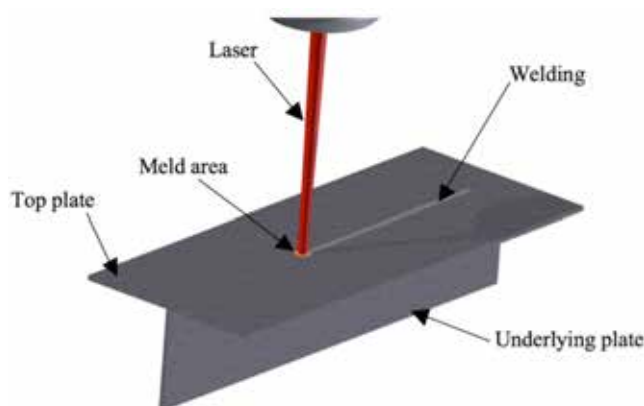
Illustration of the keyhole laser welding method in T-joints.
